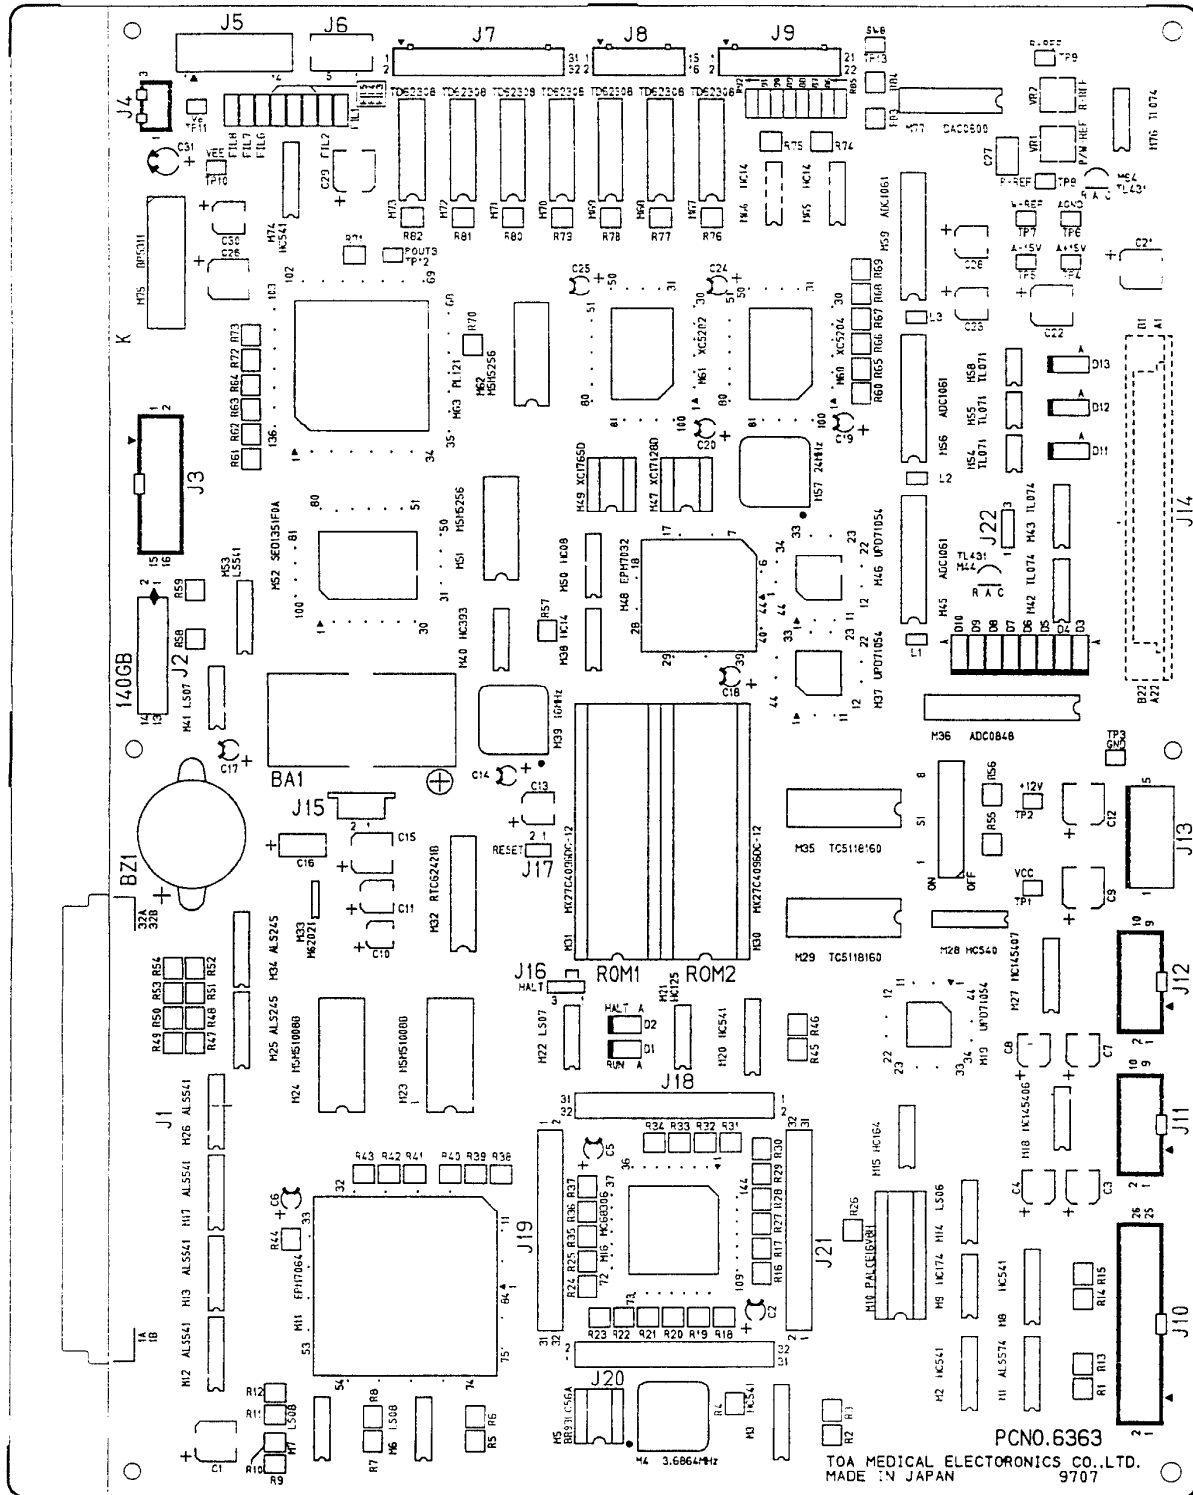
PCB No. 6363 Assembly Drawing (KX-21) 3
